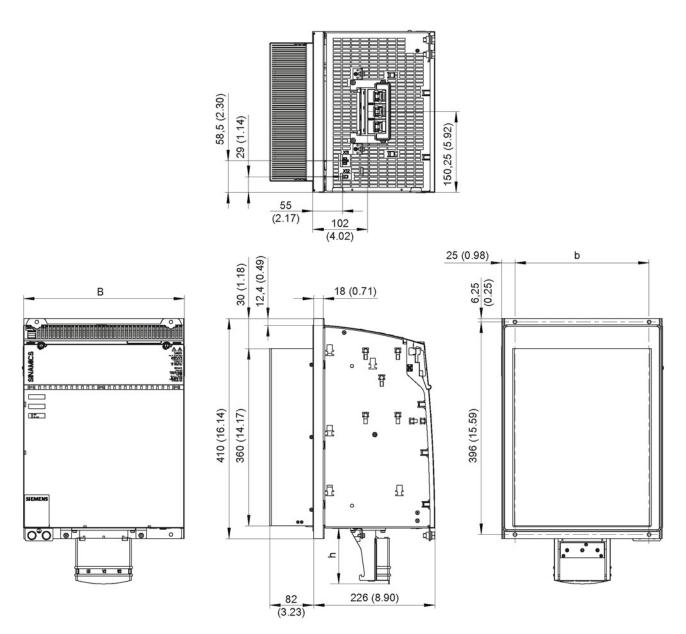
Dimension drawing of 132 A and 200 A Motor Modules Booksize, all dimensions in mm and (inches); example: 200 A Single Motor Module
